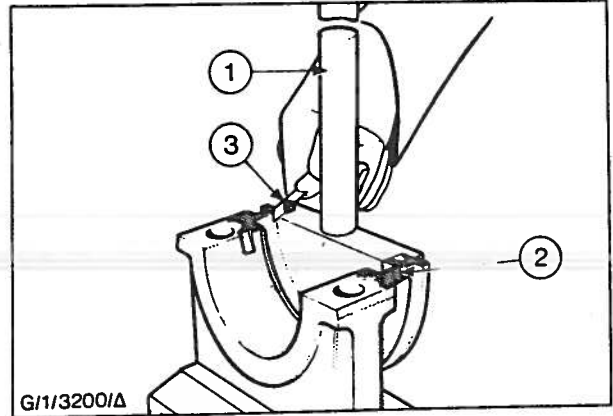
Fitting Crankshaft Rear Oil Seal - (Main Bearing Cap Shown)
